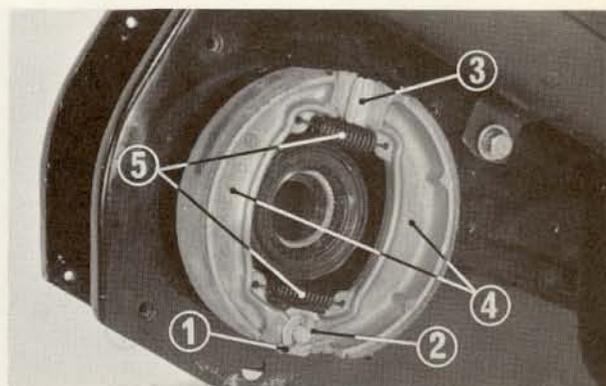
(1) Cotter pin (2) Retaining washer (3) Brake camshaft (4) Brake shoes (5) Brake shoe springs
